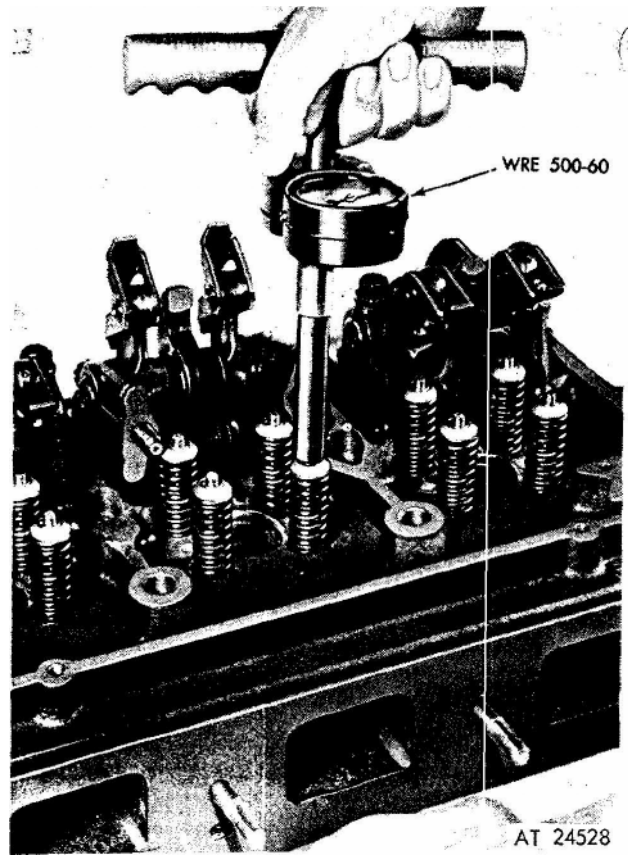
Checking exhaust valve opening with spring checking gage WRE-500-60.
